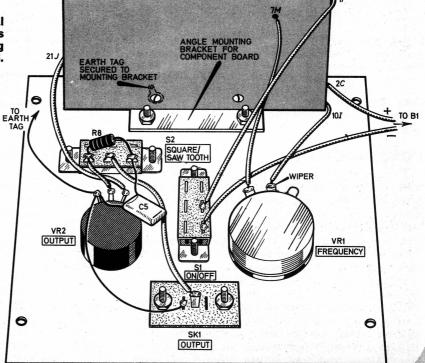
Wiring of the final unit. The tinted area is the component mounting board as shown in Fig. 6.
